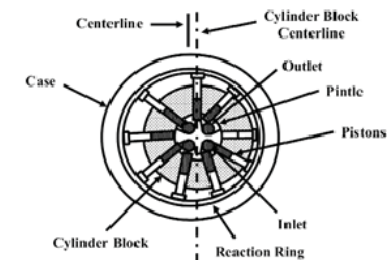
Cross Sectional View of Radial Piston Pumps
